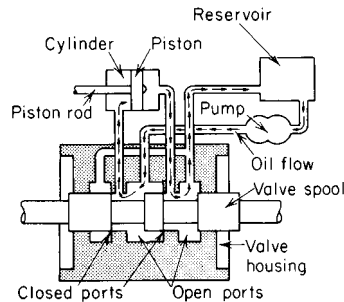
Control valve positioned for full-turn power steering assistance using maximum pump pressure.
